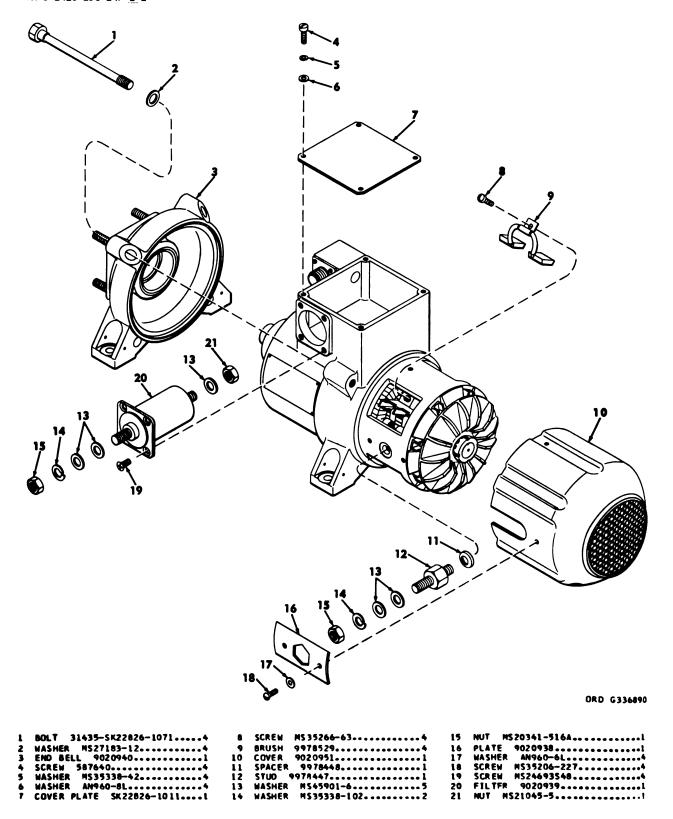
MOTOR, DIRECT CURRENT /9020643/ /SEE FIGURE 100 FOR NEXT HIGHER ASSEMBLY/
